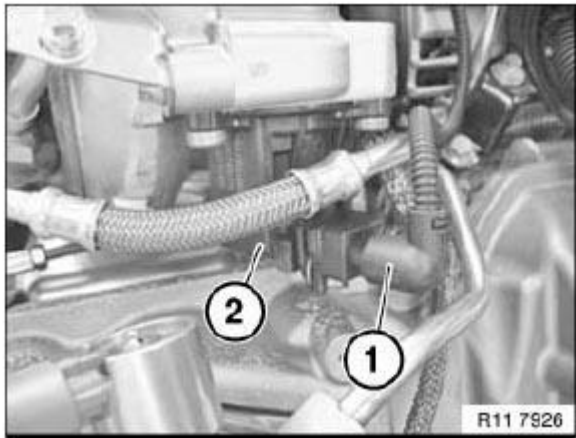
Identifying Plug Connection On Electric Changeover Valve
